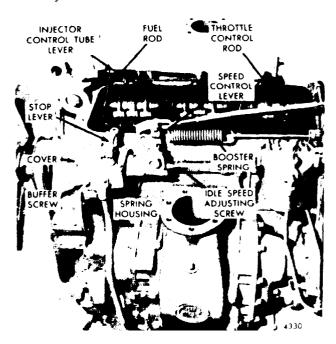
H-5. Buffer and Idle Speed Adjusting Screw
